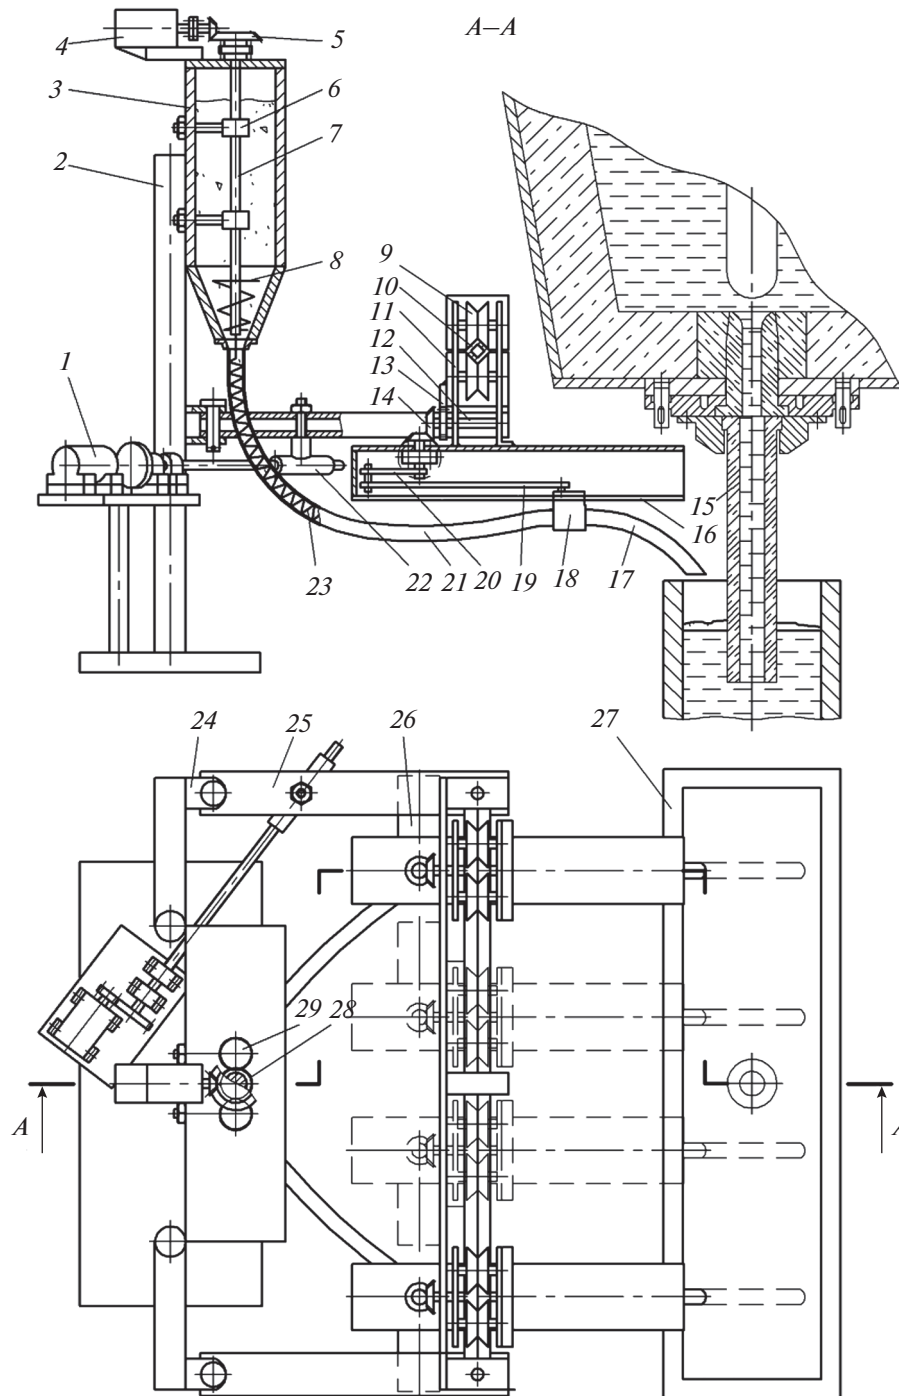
System of controlled SFM supply to the mold of a slab continuous caster for the production of casings having an extremely large cross section.
